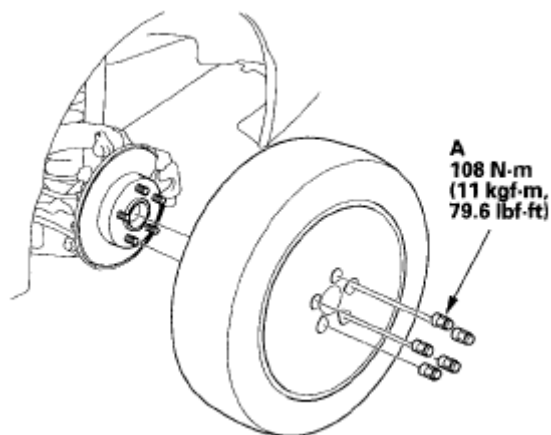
Identifying Wheel Nuts And Rear Wheel (With Torque Specifications)
